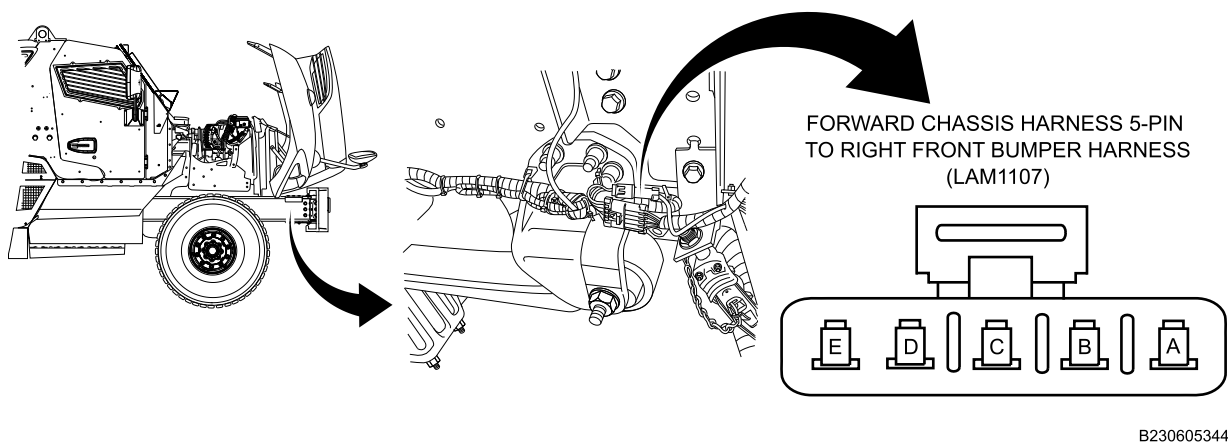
Right Front Bumper/Front Chassis Connector Near Front Spring Shackle.
